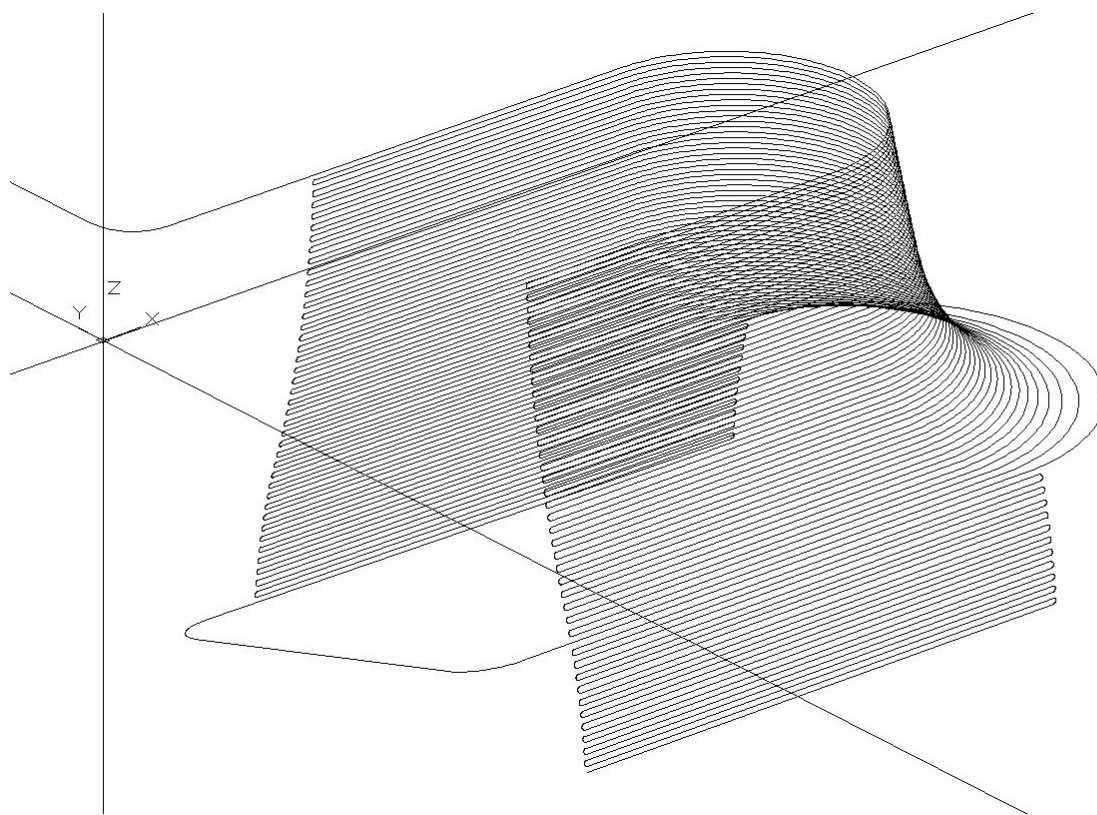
Heel Shaping Tool Path. The heel shaping tool-path establishes the sides and the radius of the heel that transitions into the neck. As the tool follows the u-shaped path, it steps down and begins the next.
